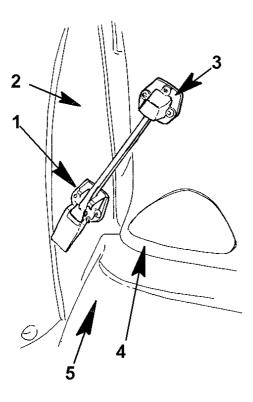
Hood Latch Assembly (Passenger Side Shown)
